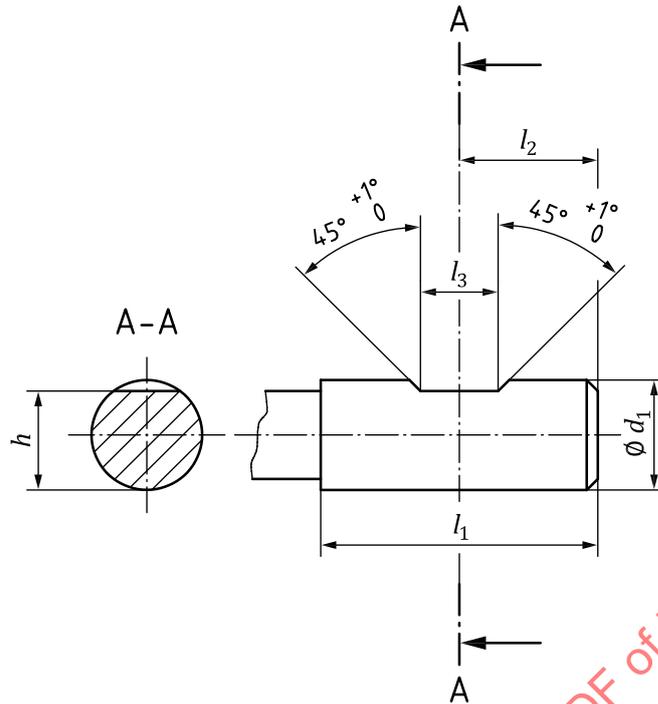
WE Form — Flatted cylindrical shanks with single flat
